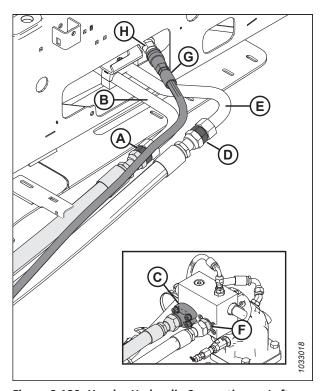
Header Hydraulic Connections – Left Side of Windrower
